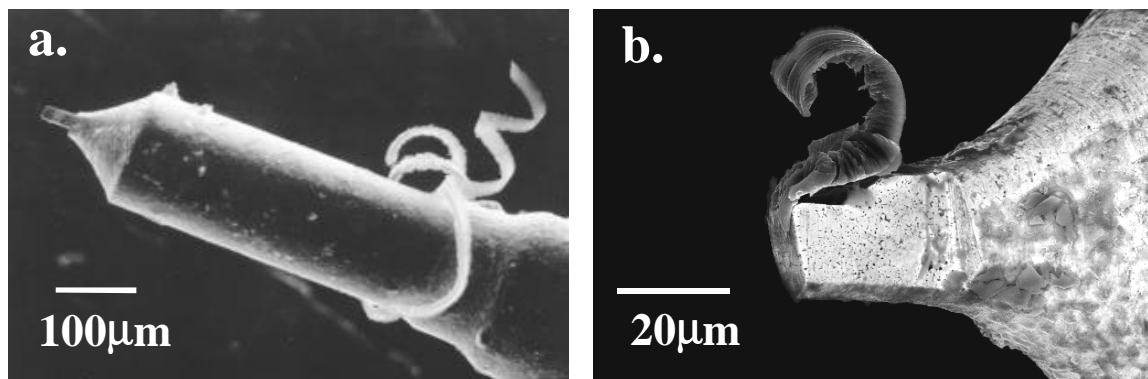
Scanning electronmicrographs of micro-grooving tools after machining PMMA (a.) and 6061-T6 aluminum (b.).
